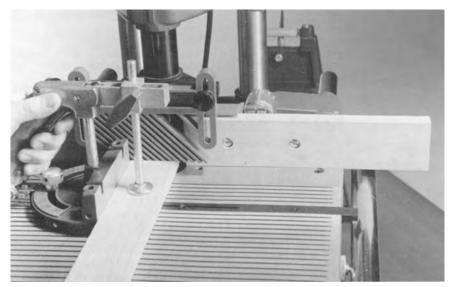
Unless the workpiece is wide enough to provide sufficient bearing surface against the fence boards, make all cross-grain cuts with the miter gauge and safety grip.
